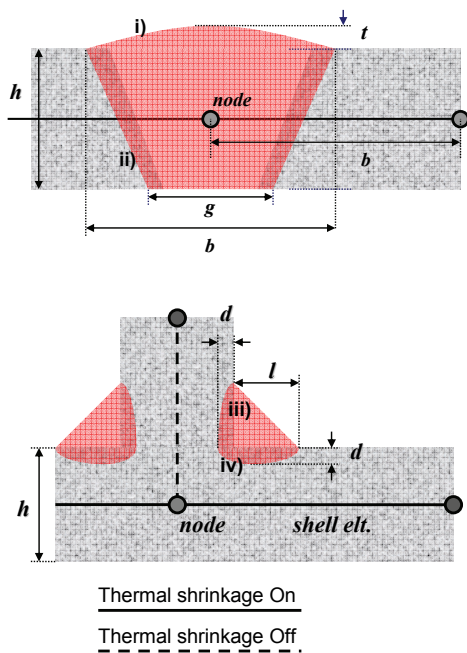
Sections of butt/fillet-welded plates for introducing width of inherent strain region
